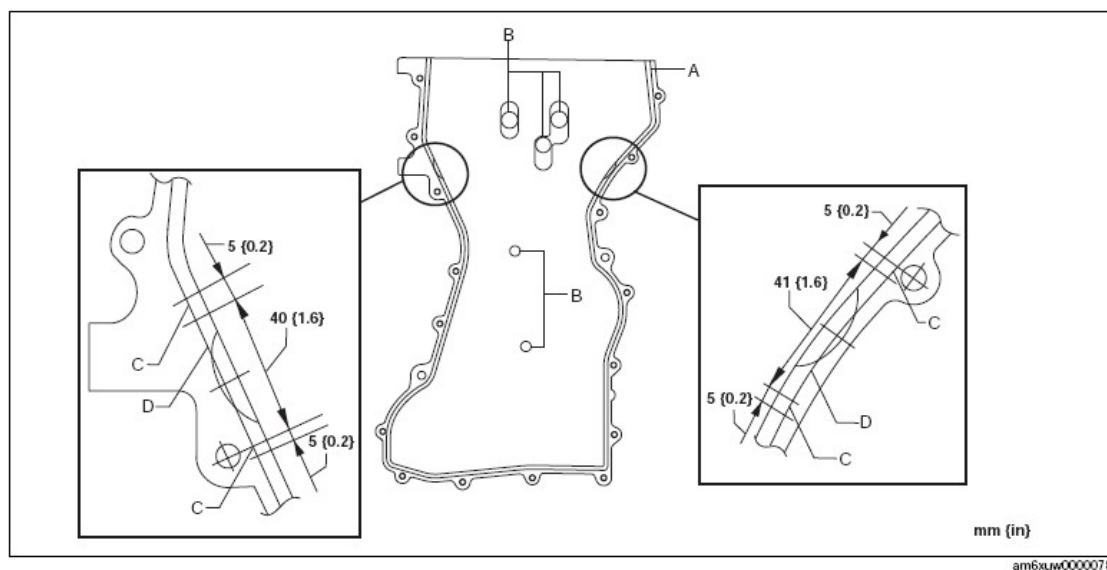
Applying Silicone Sealant To Engine Front Cover
